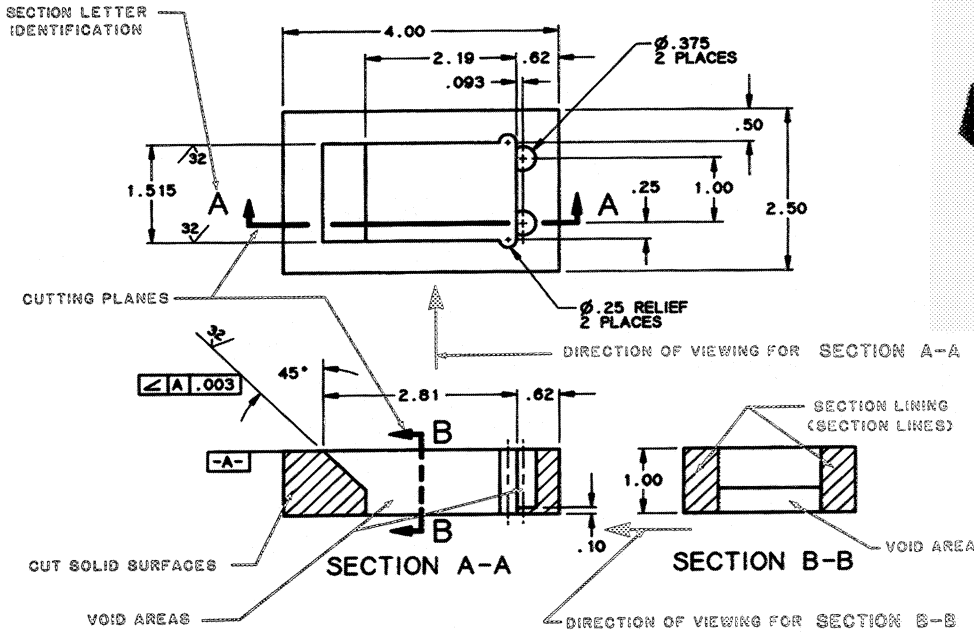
Three-View Drawing Using Sections as the Front and Side Views
